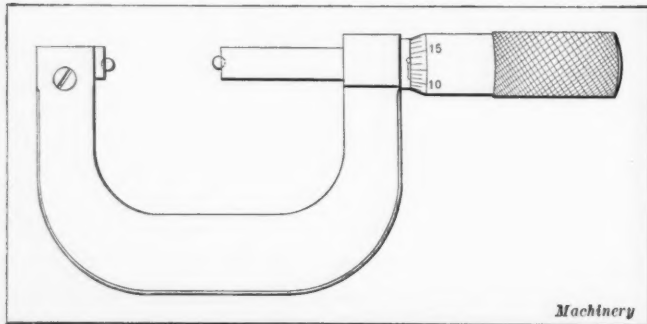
Micrometer with Hardened Balls fitted in Anvil and Spindle to adapt Tool for measuring Diameter of Threaded Work
